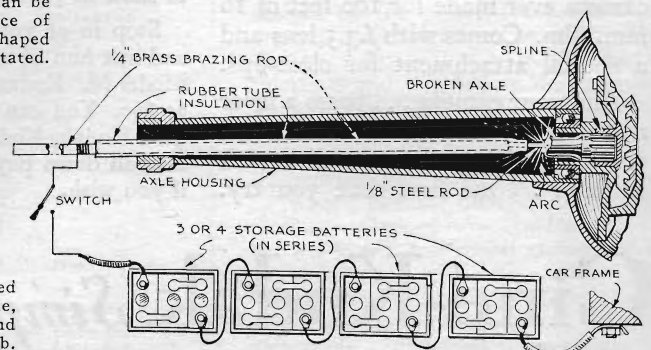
A rod can be welded to the stub of a broken axle, as shown at the right, and used to pull out the stub.
